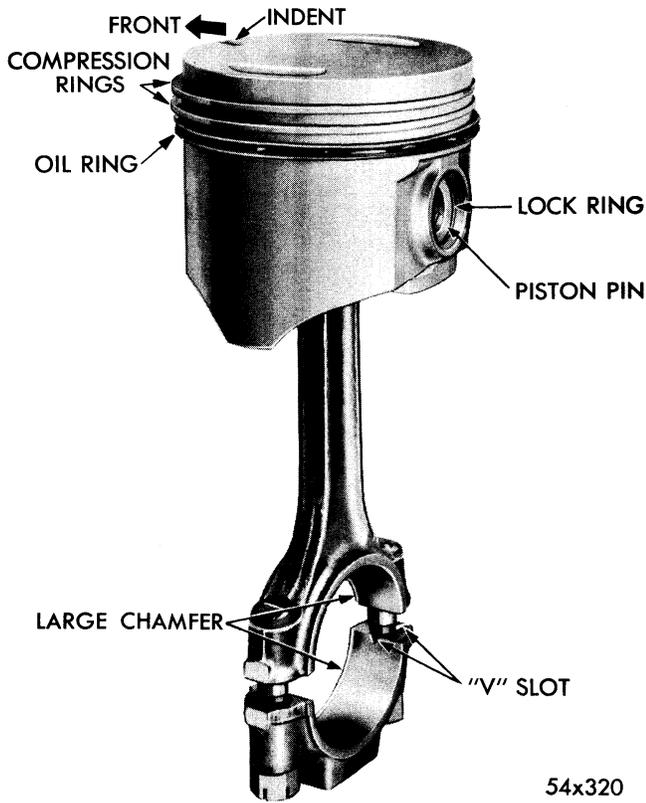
Piston and Connecting Rod Assembly—V-8 Engine—Right Bank
